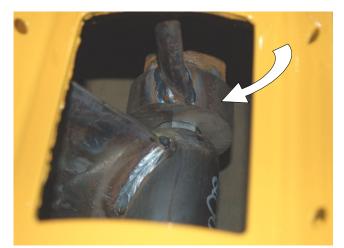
BEARING REPLACEMENT (Hanger Bearing)
